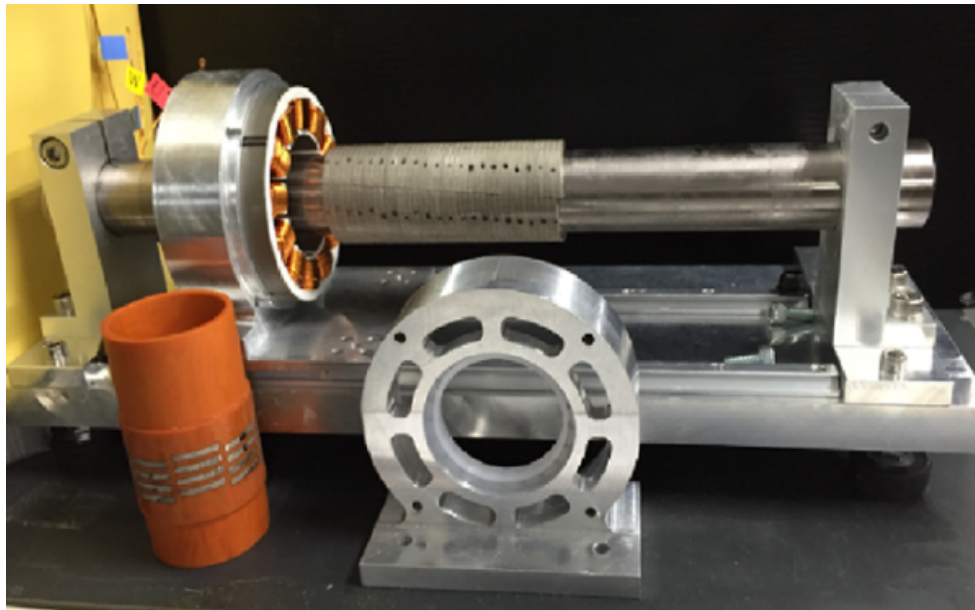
Manufactured Prototype Parts - Radial Gap Helical *RotLin* machine
